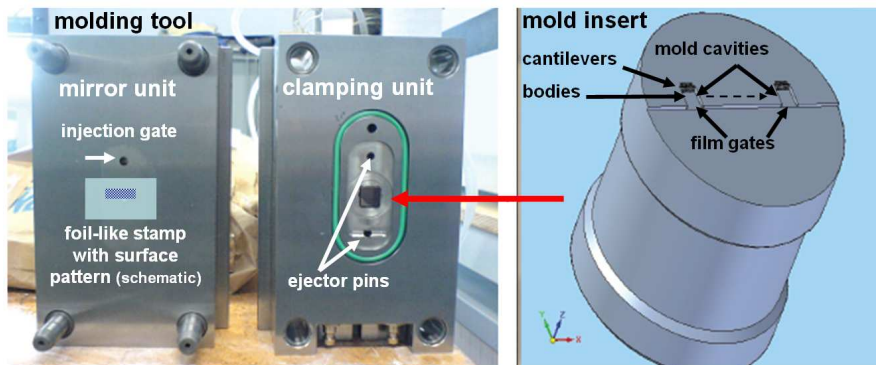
Molding tool (handy mold) with two sides (left side). The mirror side contains the gate (top) and the location, where the patterned foil is placed. The clamping unit contains the mold insert (right side) with two mold cavities.
